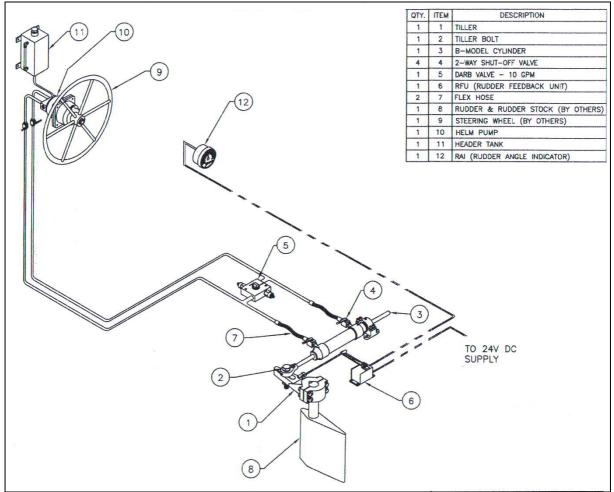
Typical steering gear arrangement of a small boat.
